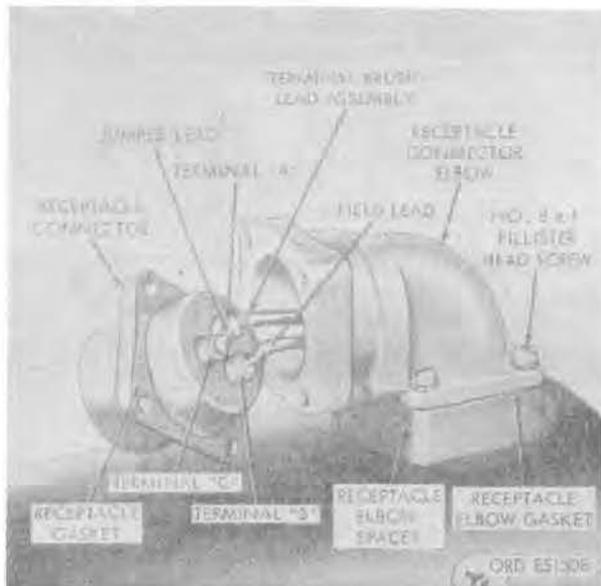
RECEPTACLE CONNECTOR WIRING.
